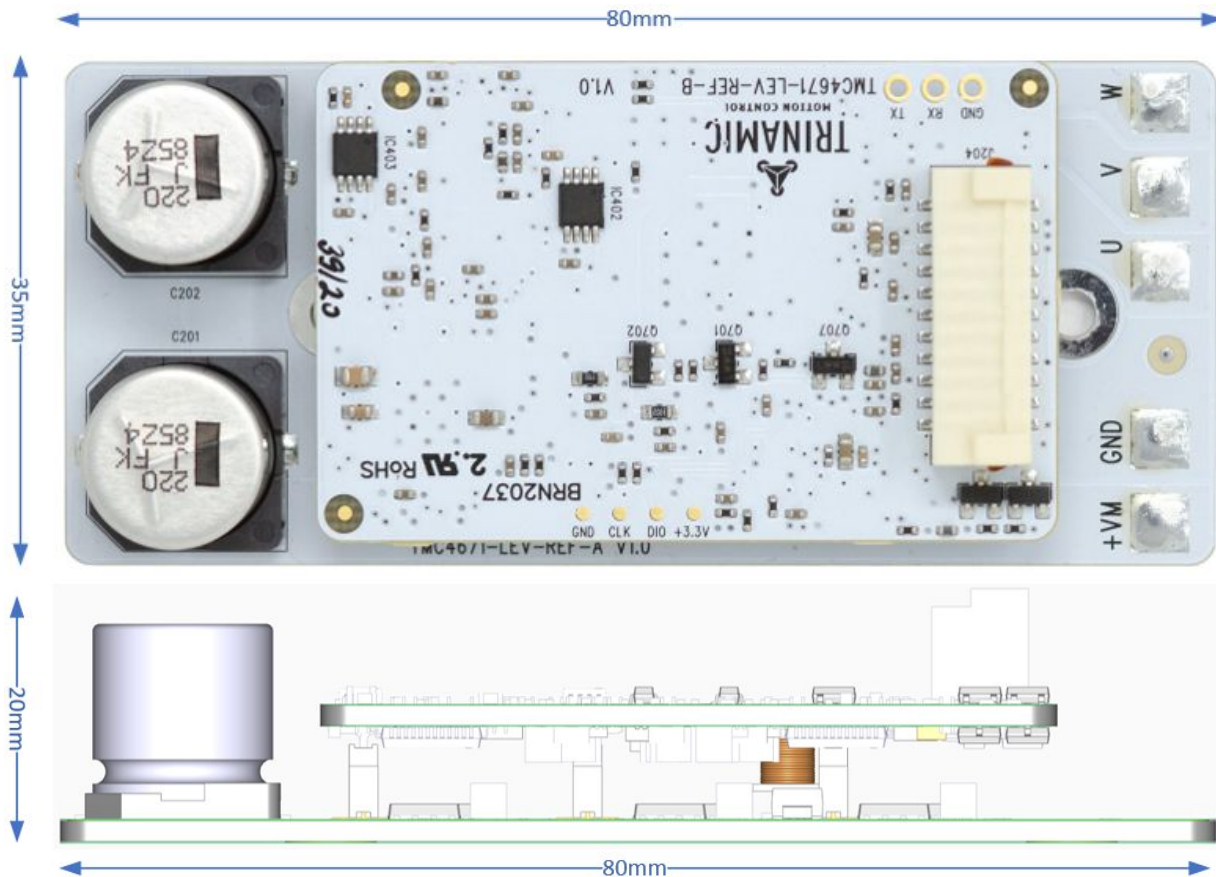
TMC4671-LEV-REF top view mechanical dimensions
